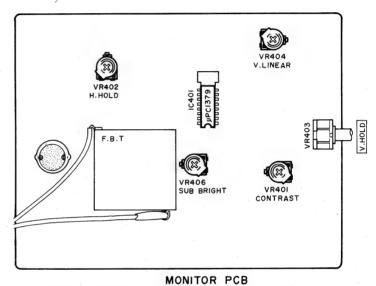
MONITOR P. C BOARD ADJUSTMENT POINT
